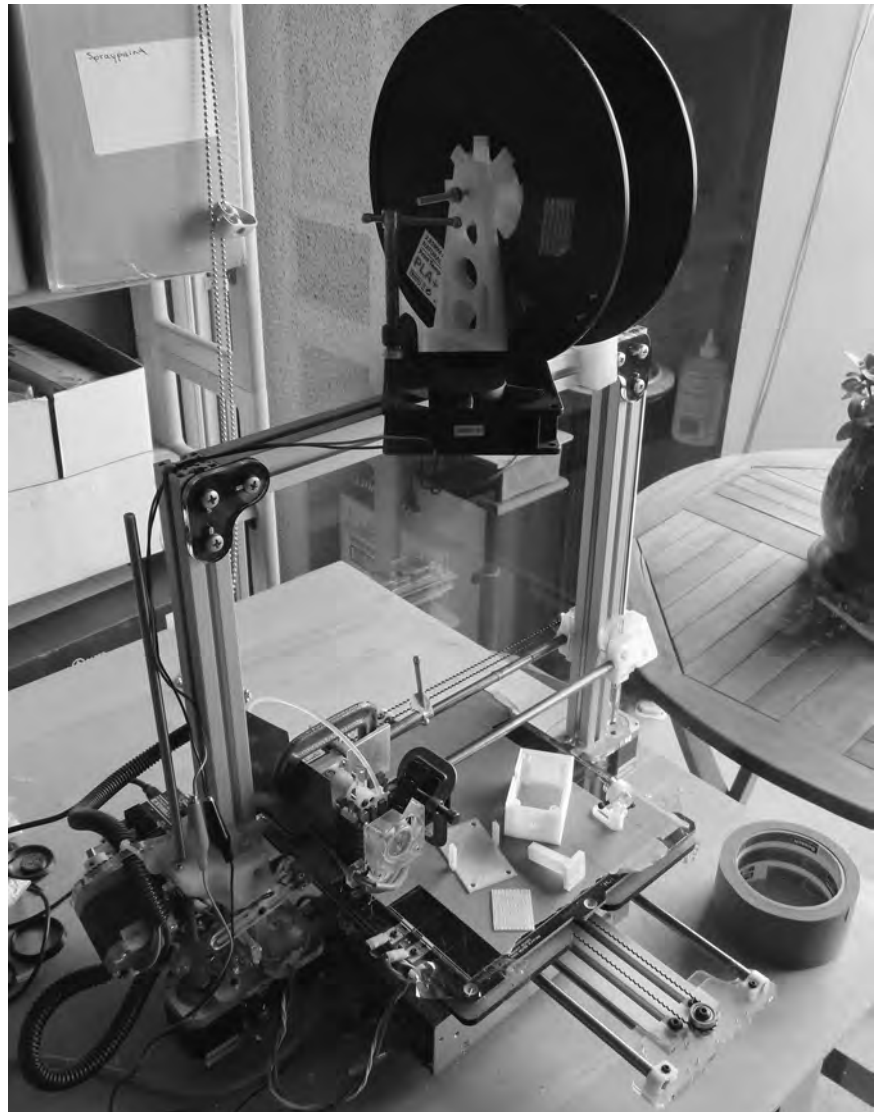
Bukobot 3D printer with some example 3D-printed parts.
